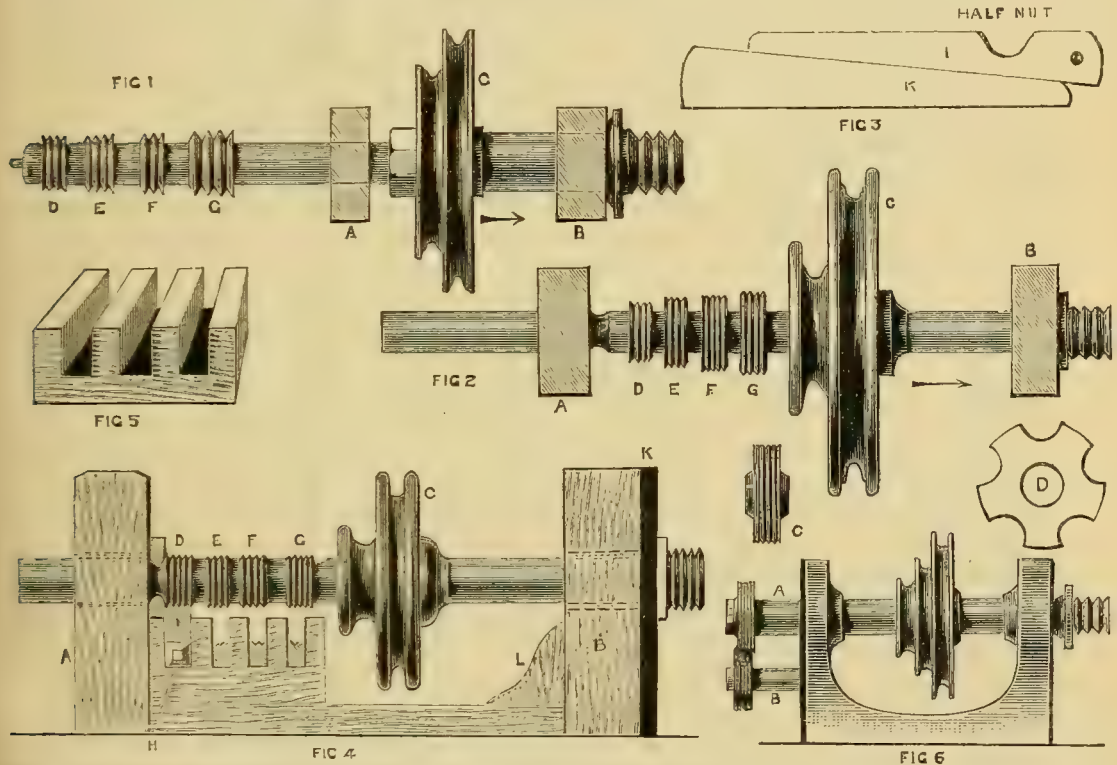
GUIDE SCREWS OUTSIDE HEADSTOCK. FIG. 2.—GUIDE SCREWS INSIDE HEADSTOCK. FIG. 3.—HALF NUT AND ITS KEY. FIG. 4.—HEADSTOCK FITTED WITH GUIDES COMPLETE. FIG. 5.—WOODEN BLOCK FOR HALF NUTS AND KEYS. FIG. 6.—MODERN TRAVERSING MANDREL AND DETACHED GUIDES.
